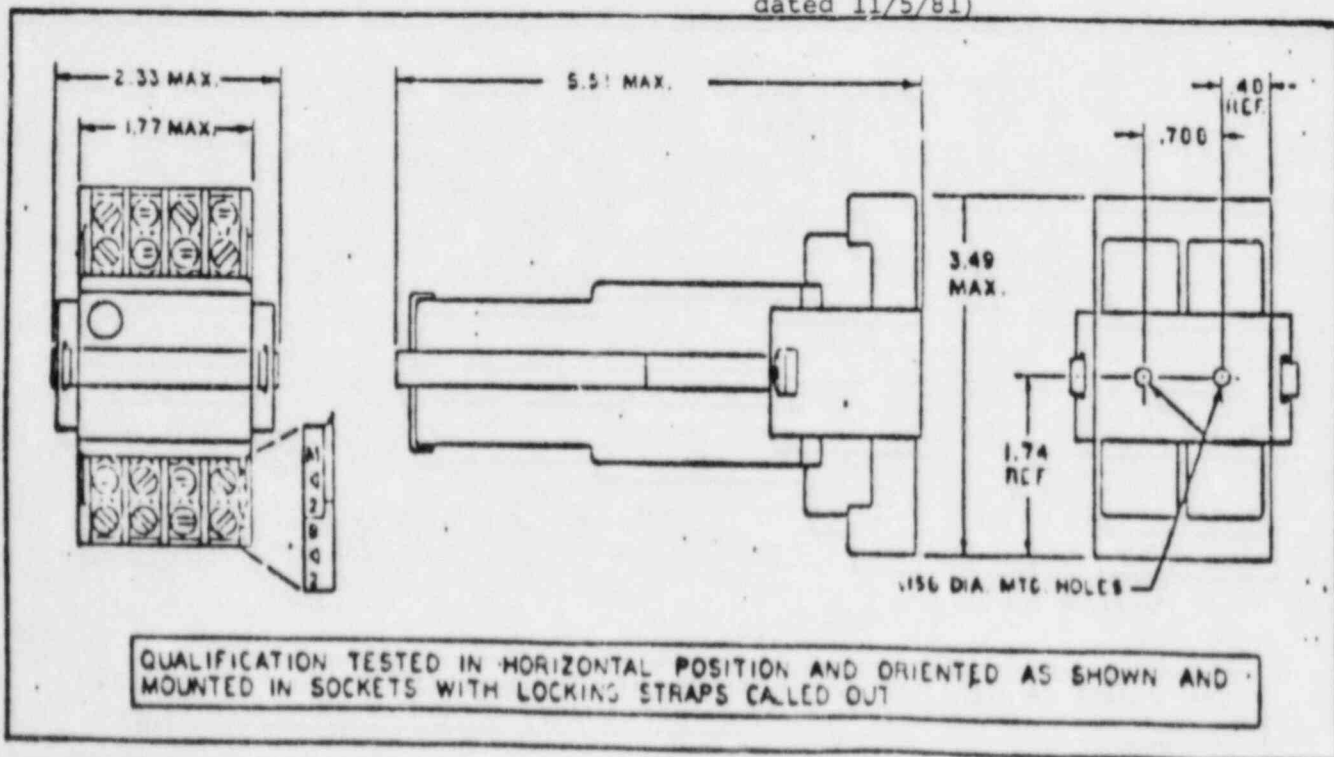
Model EML Relay with ECR0001-001 Socket (with captive clamp terminals) or ECR0002-001 Socket (with screw terminals) and ECR0133-001 Locking Strap.
